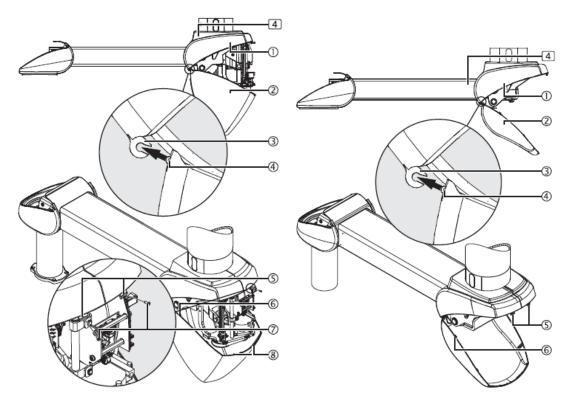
Mounting of the lower rear cover on a spring or motor arm
